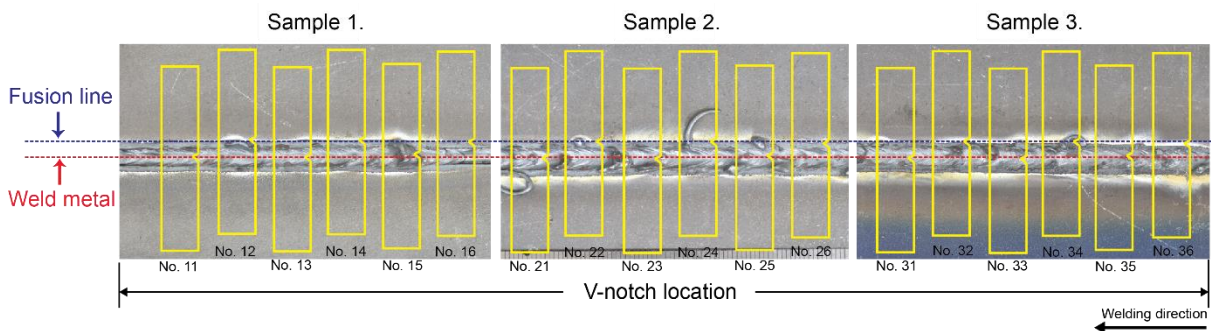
Cut-off plan and notch locations for V-notched Charpy impact test specimen.
